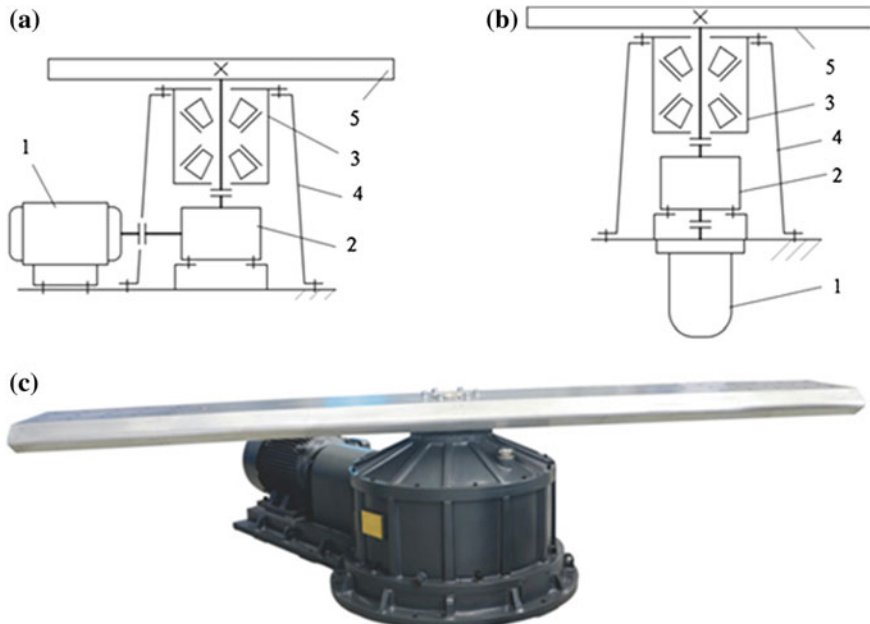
Configurations of centrifuges with classic gear drive: a with a motor in a radial position; b with a motor in an axial position; c SY31 series centrifuge (manufacturer: DONLING Technologies); 1 electric motor, 2 gear reducer, 3 spindle, 4 housing, 5 rotor
